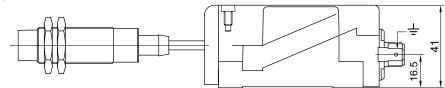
Processor with integrated read head BIS L-409-045-001-07-S4 (dimensions in mm)
